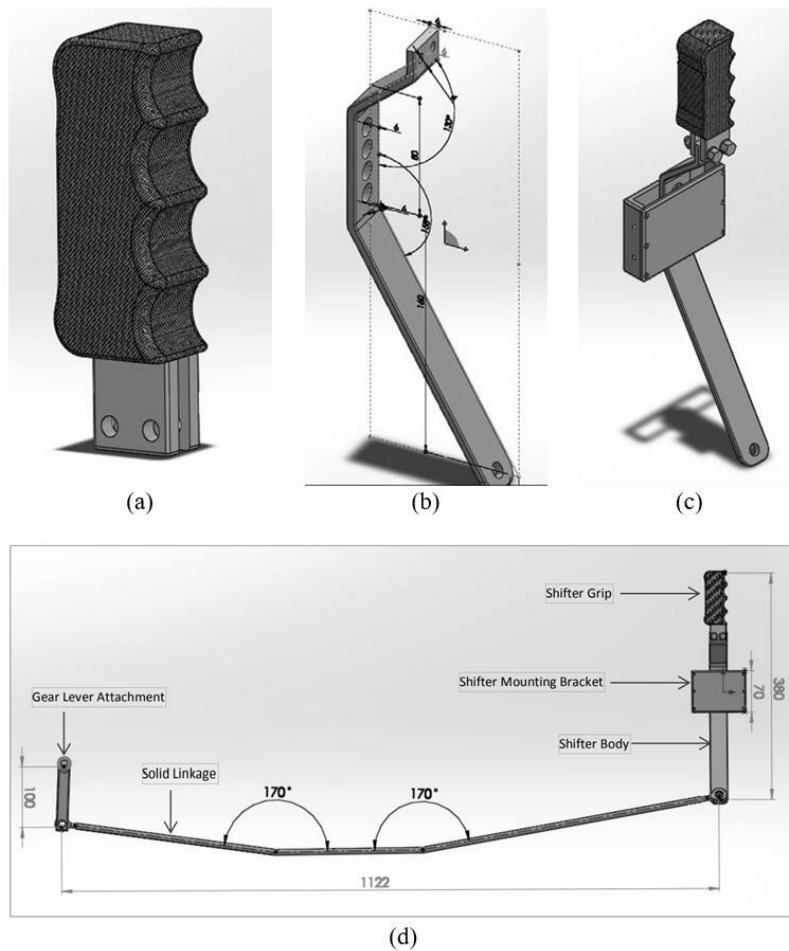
Shifter’s (a) grip, (b) body, (c) mounting, and (d) assembly
